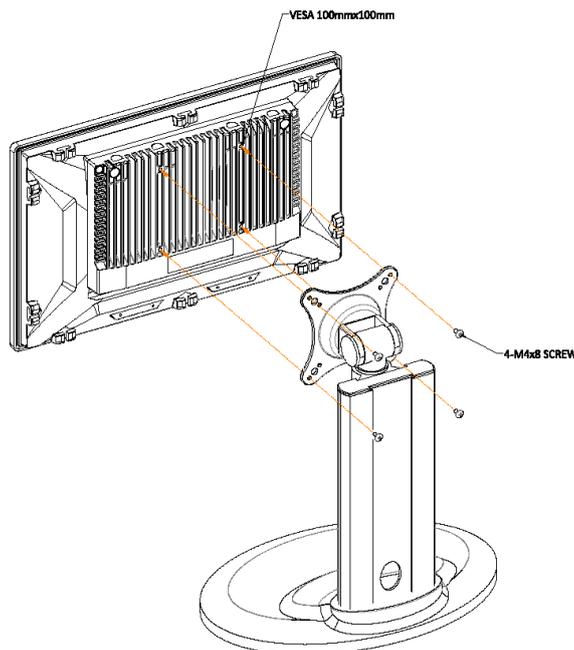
AUHMI-916C/AUHMI-921C VESA Mounting
